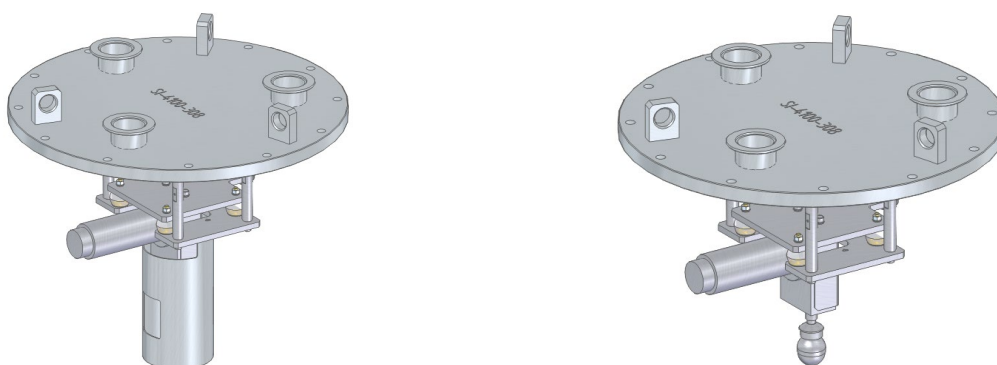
Engineering drawings of ball mill system with (left) and without protecting “pot” (right).
